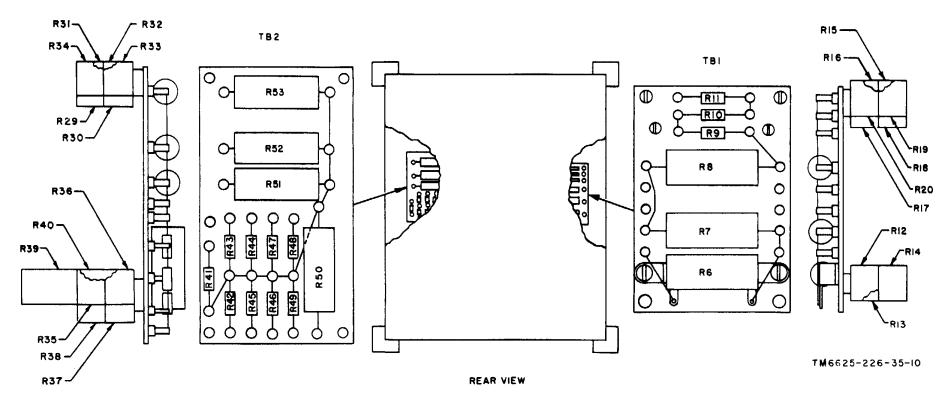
Tester chassis, showing location of terminal boards TB1 and TB2.
